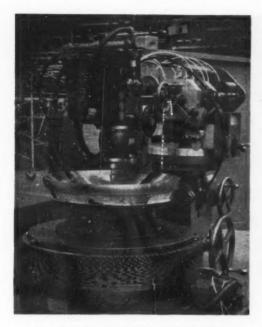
Four thousand holes of small diameter are drilled to accurate centre distances in injector heads on this machine which incorporates a special indexing arrangement
